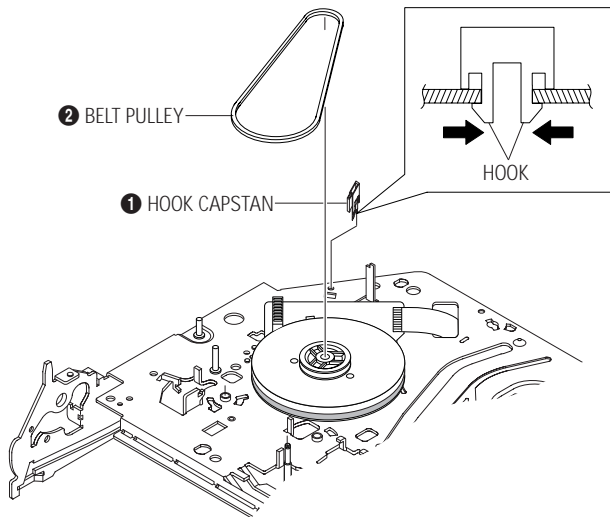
Hook Capstan, Belt Pulley Removal
